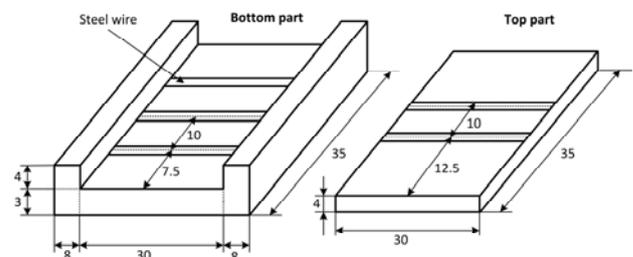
Dimensions of a micro-bending sensor with five steel wires
